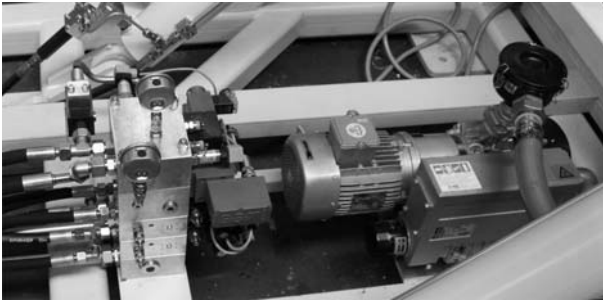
Vacuum pump and valves of a large piston extruder (split version)
